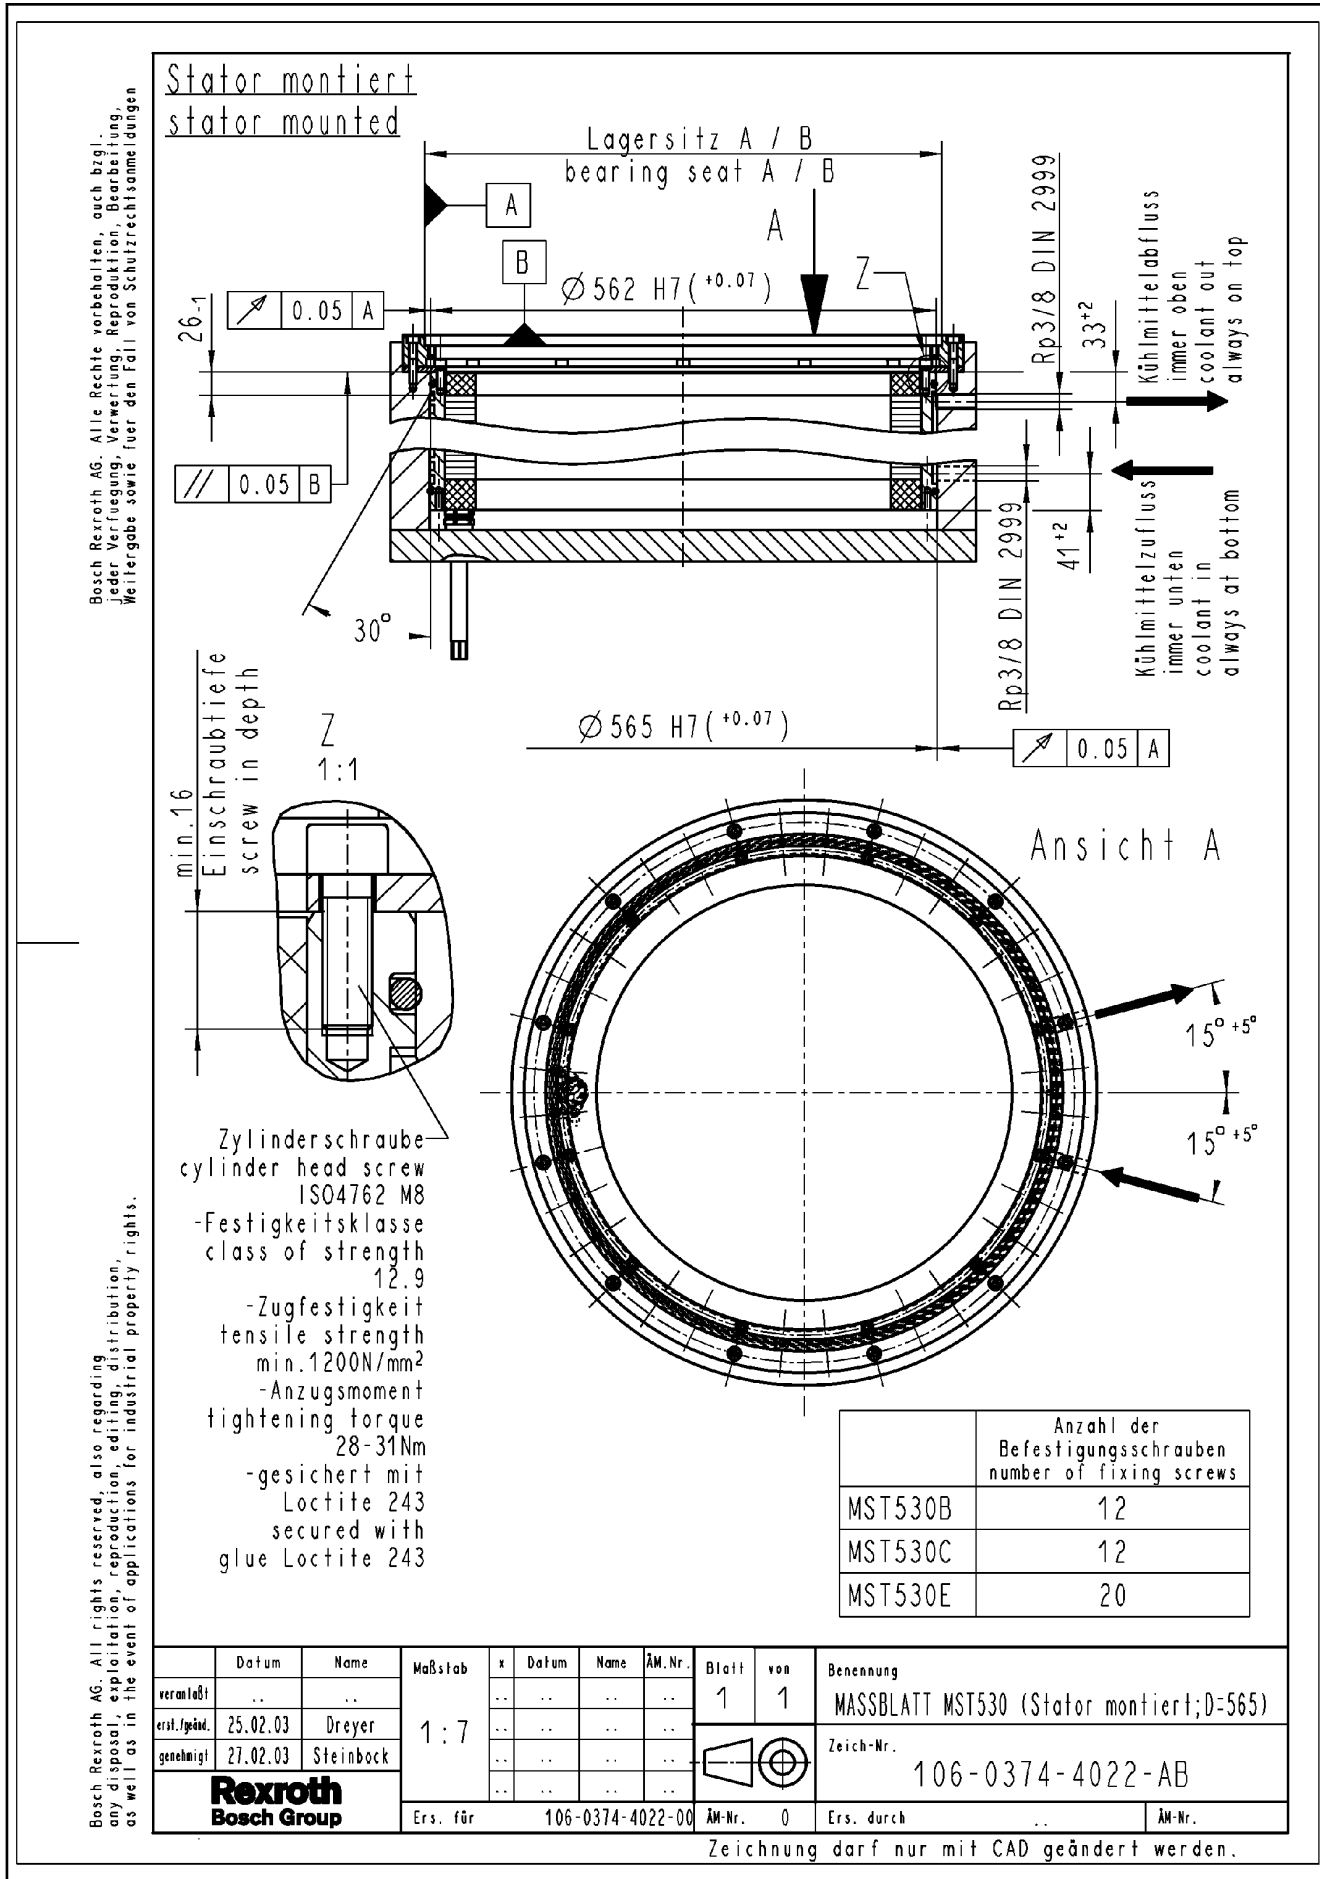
Dimension sheet MST530 mounted, electrical connection "CN"
